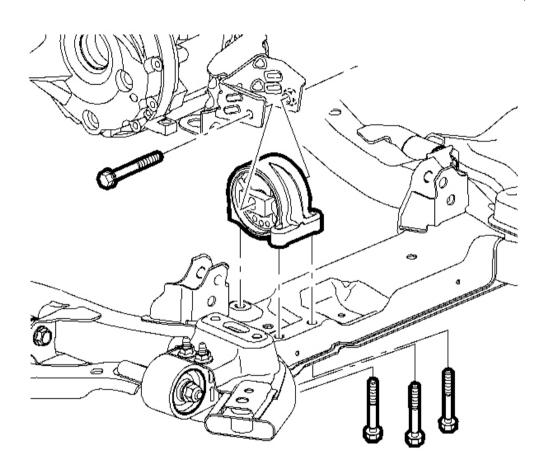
Locating Engine Mount Courtesy of GENERAL MOTORS CORP.
